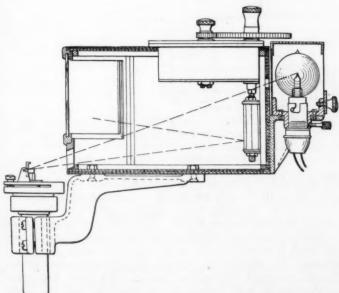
Cross-Section of a Recently Developed Optical Gas-Engine Indicator
